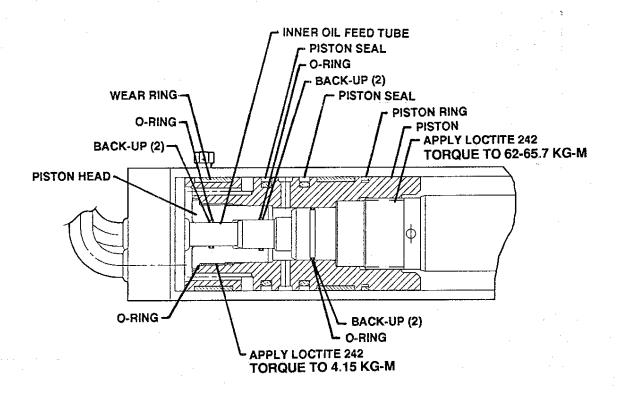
PISTON, PISTON HEAD AND SEALS
